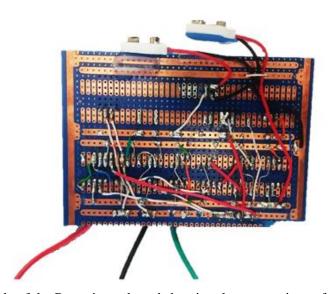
Back side of the Potentiostat board showing the connections of wires and solder.
